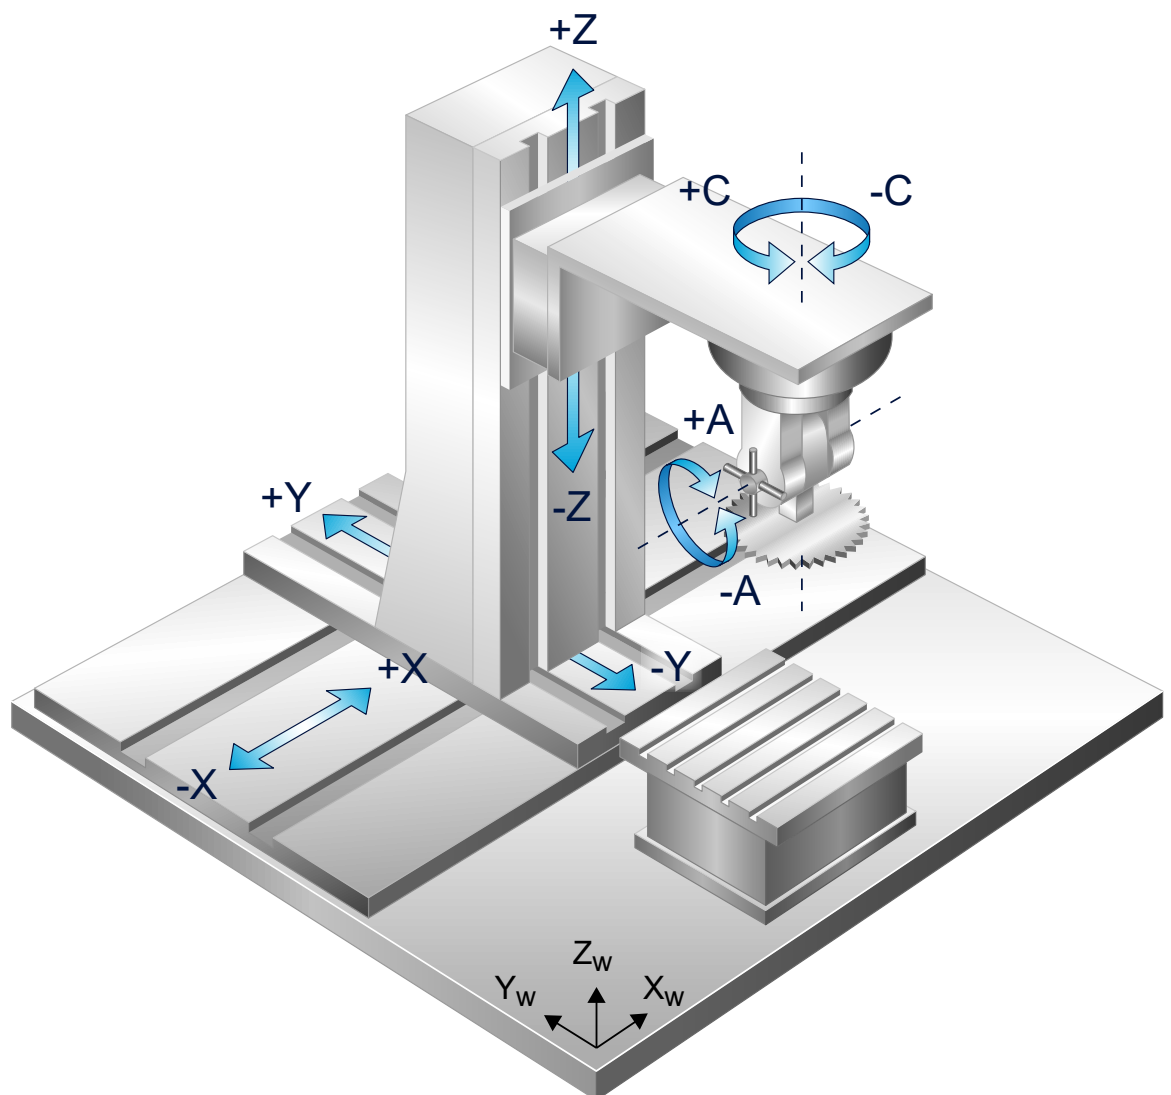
5-axis kinematics (sawing tool with manual auxiliary axis A)
